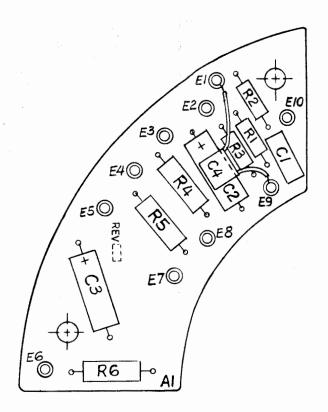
Turret Drive Gear Assembly (P/O A2A4), Component Locations
